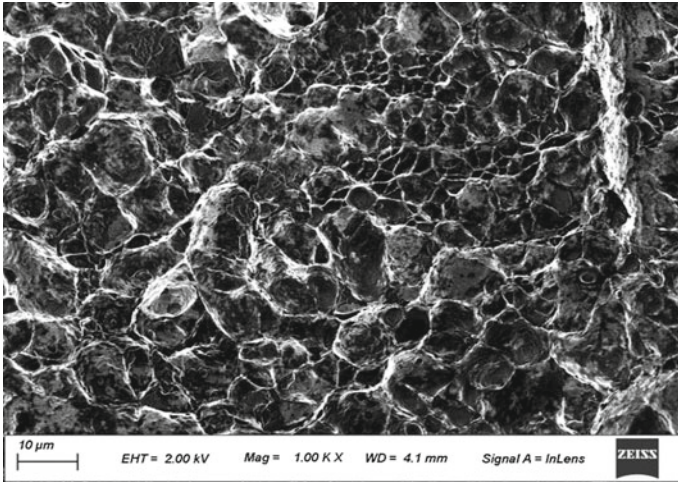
Tensile fracture of 10-mm-thick DSSAW Sample
